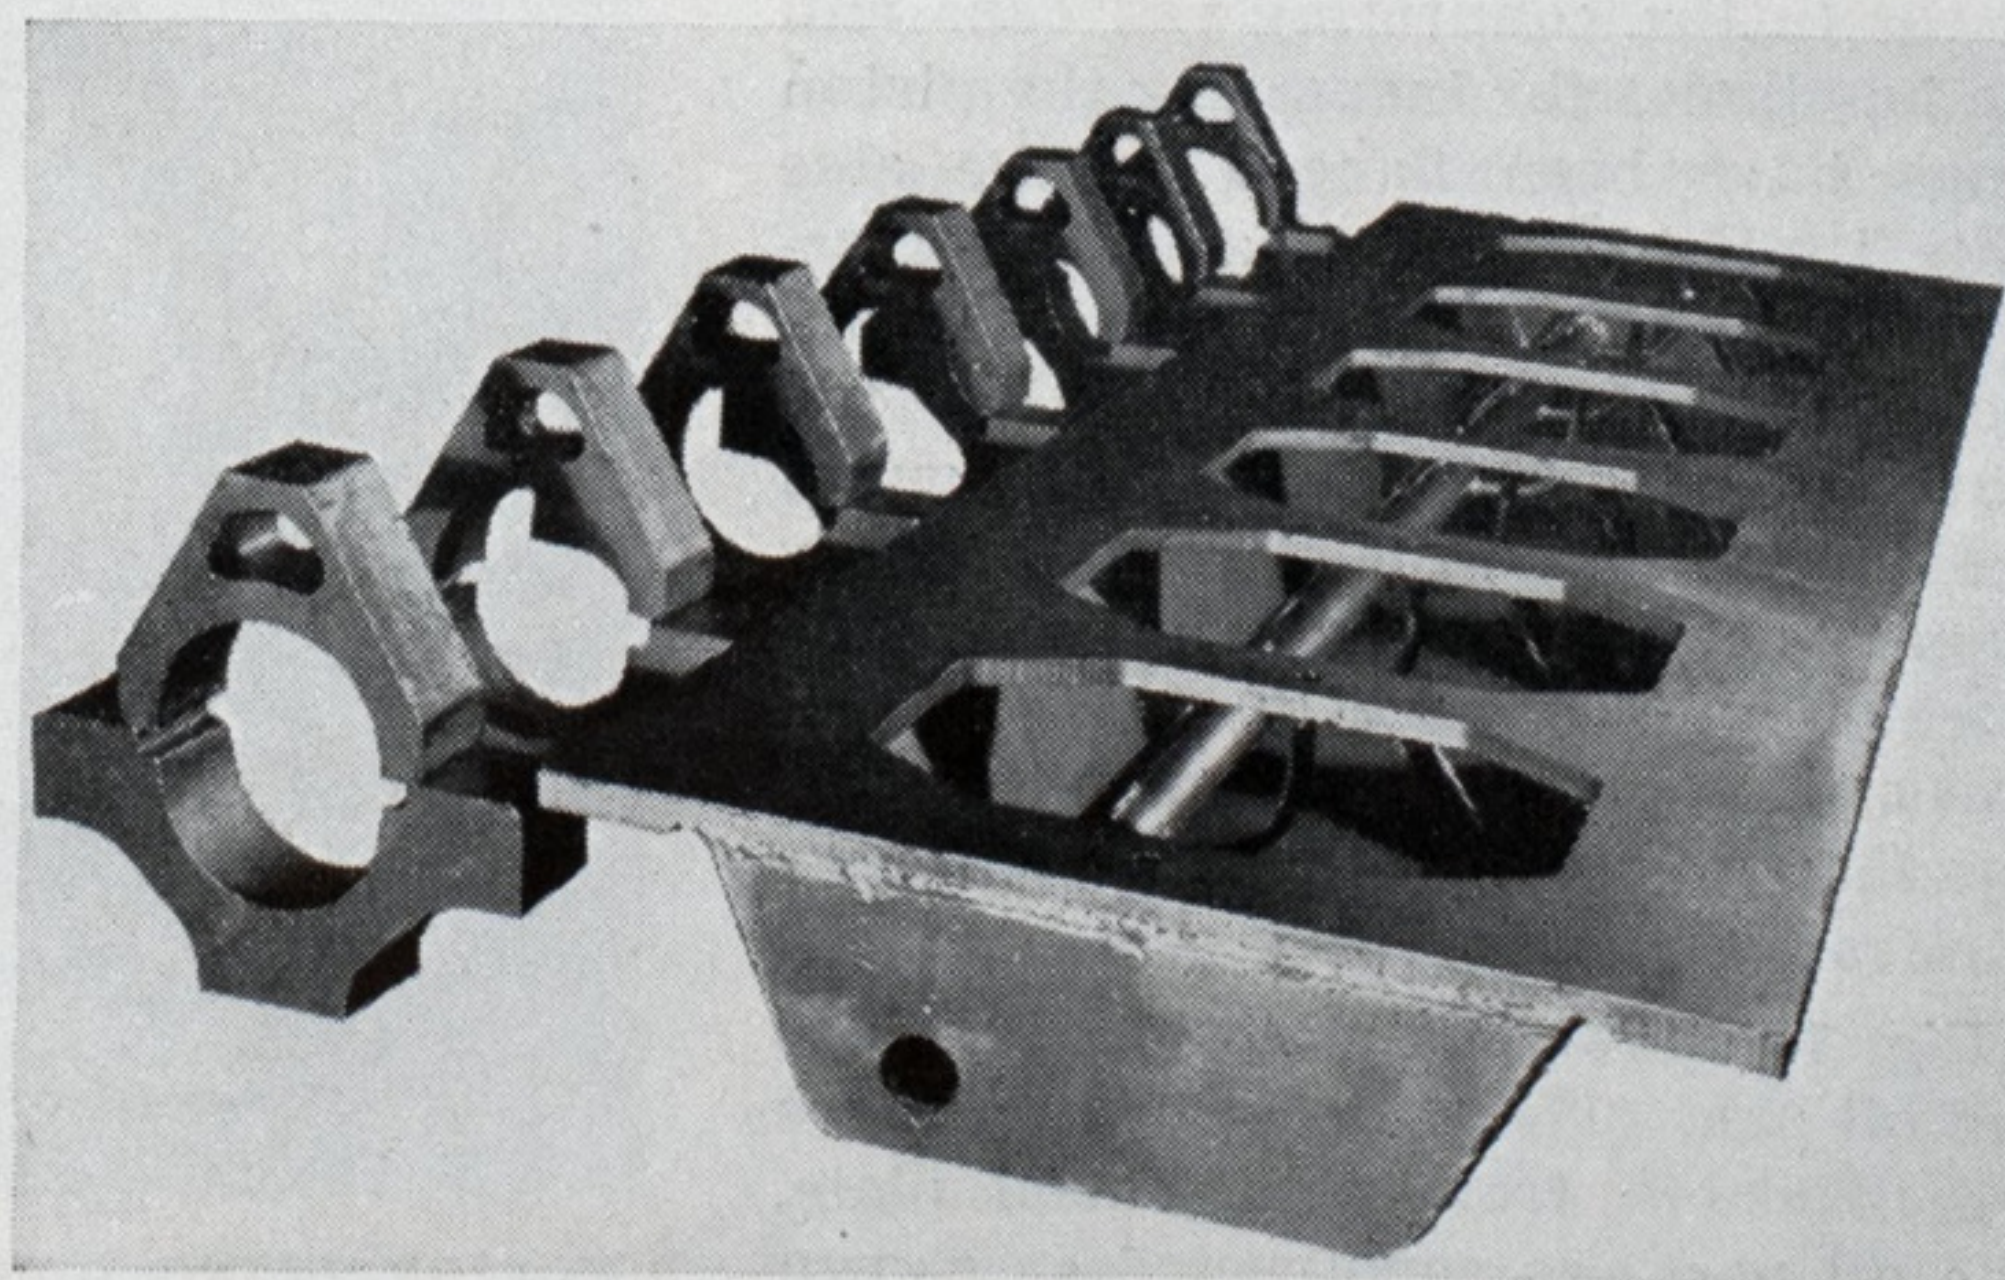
Welded steel crankcase for a 10-cylinder 600-horsepower radial engine. Weight is less than 1 pound per horsepower
